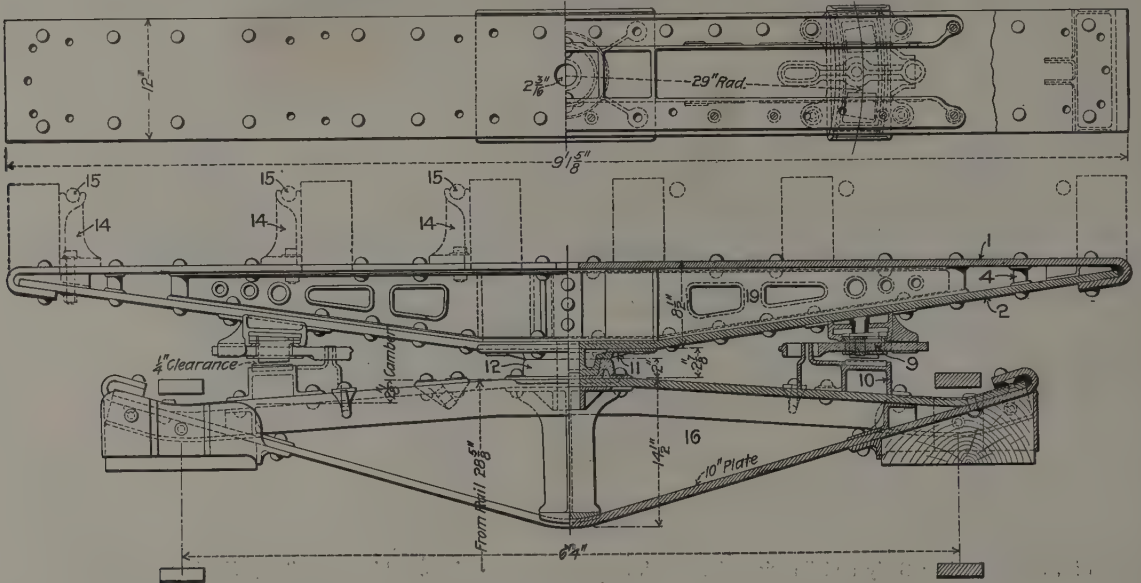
"Simplex" Body and Truck Bolsters with Susemihl Roller Side Bearings. American Steel Foundries.
